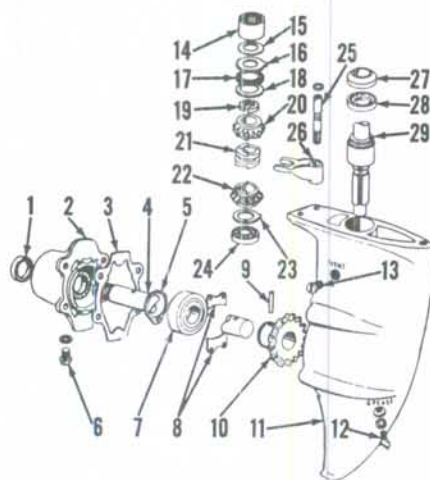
Exploded view of gearcase housing and associated parts used on Fleet Scott and McCulloch 14.
